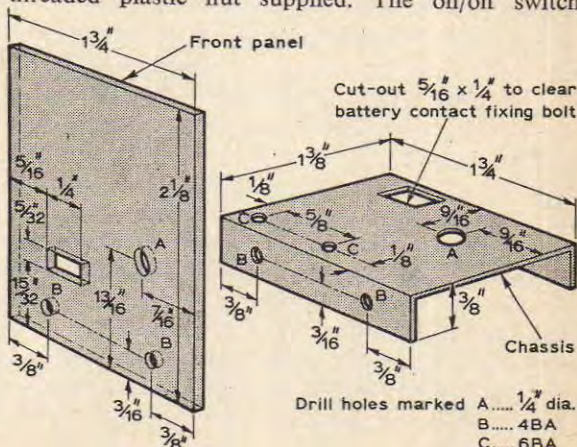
Drilling details for the chassis and front panel. Note—these details might alter with differing components. Check sizes etc., first before drilling.
